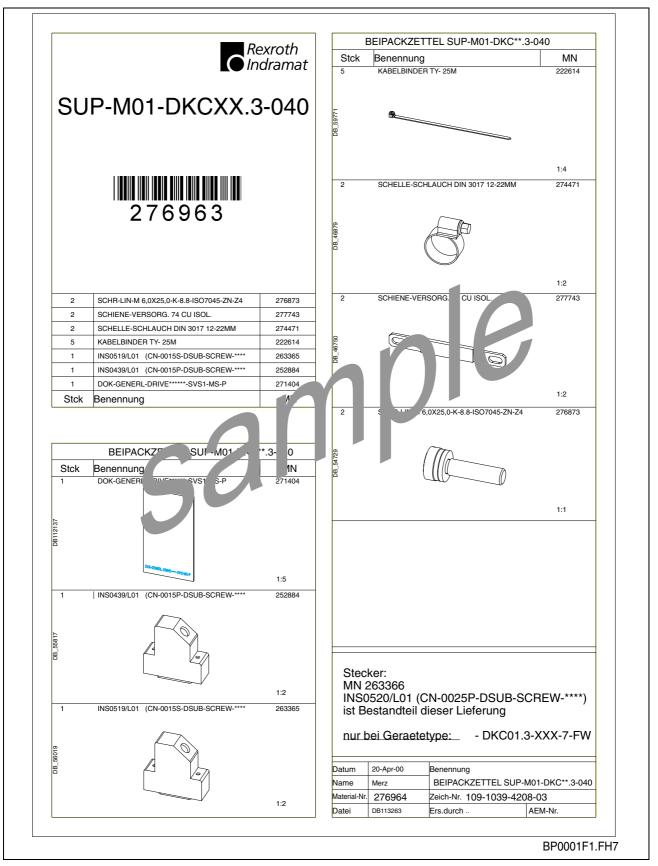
Packaging slip SUB-M01-DKCxx.3-040 (sample)
